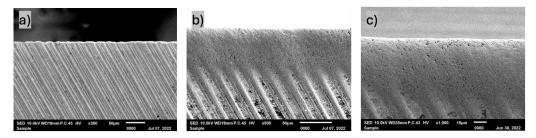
The tool wear mechanism observed under SEM a) new tool b) and c) cutting egdge rounding indicates the worn out tool
